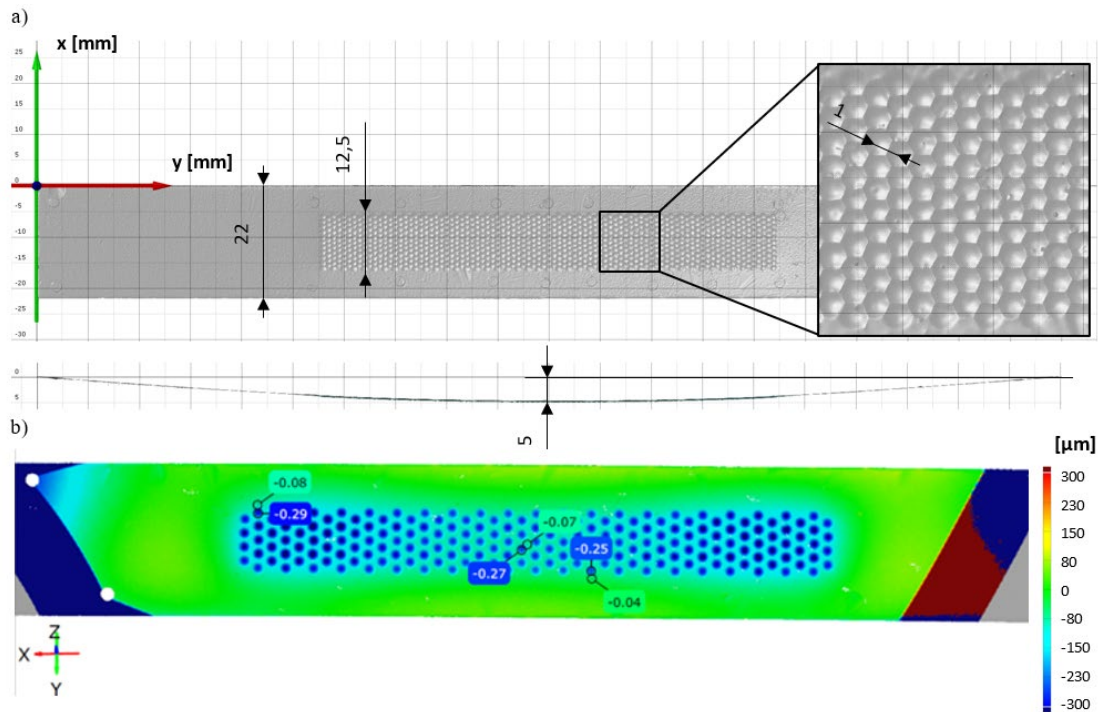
Measurement of the embossed flat tensile specimens with different embossing geometries.
